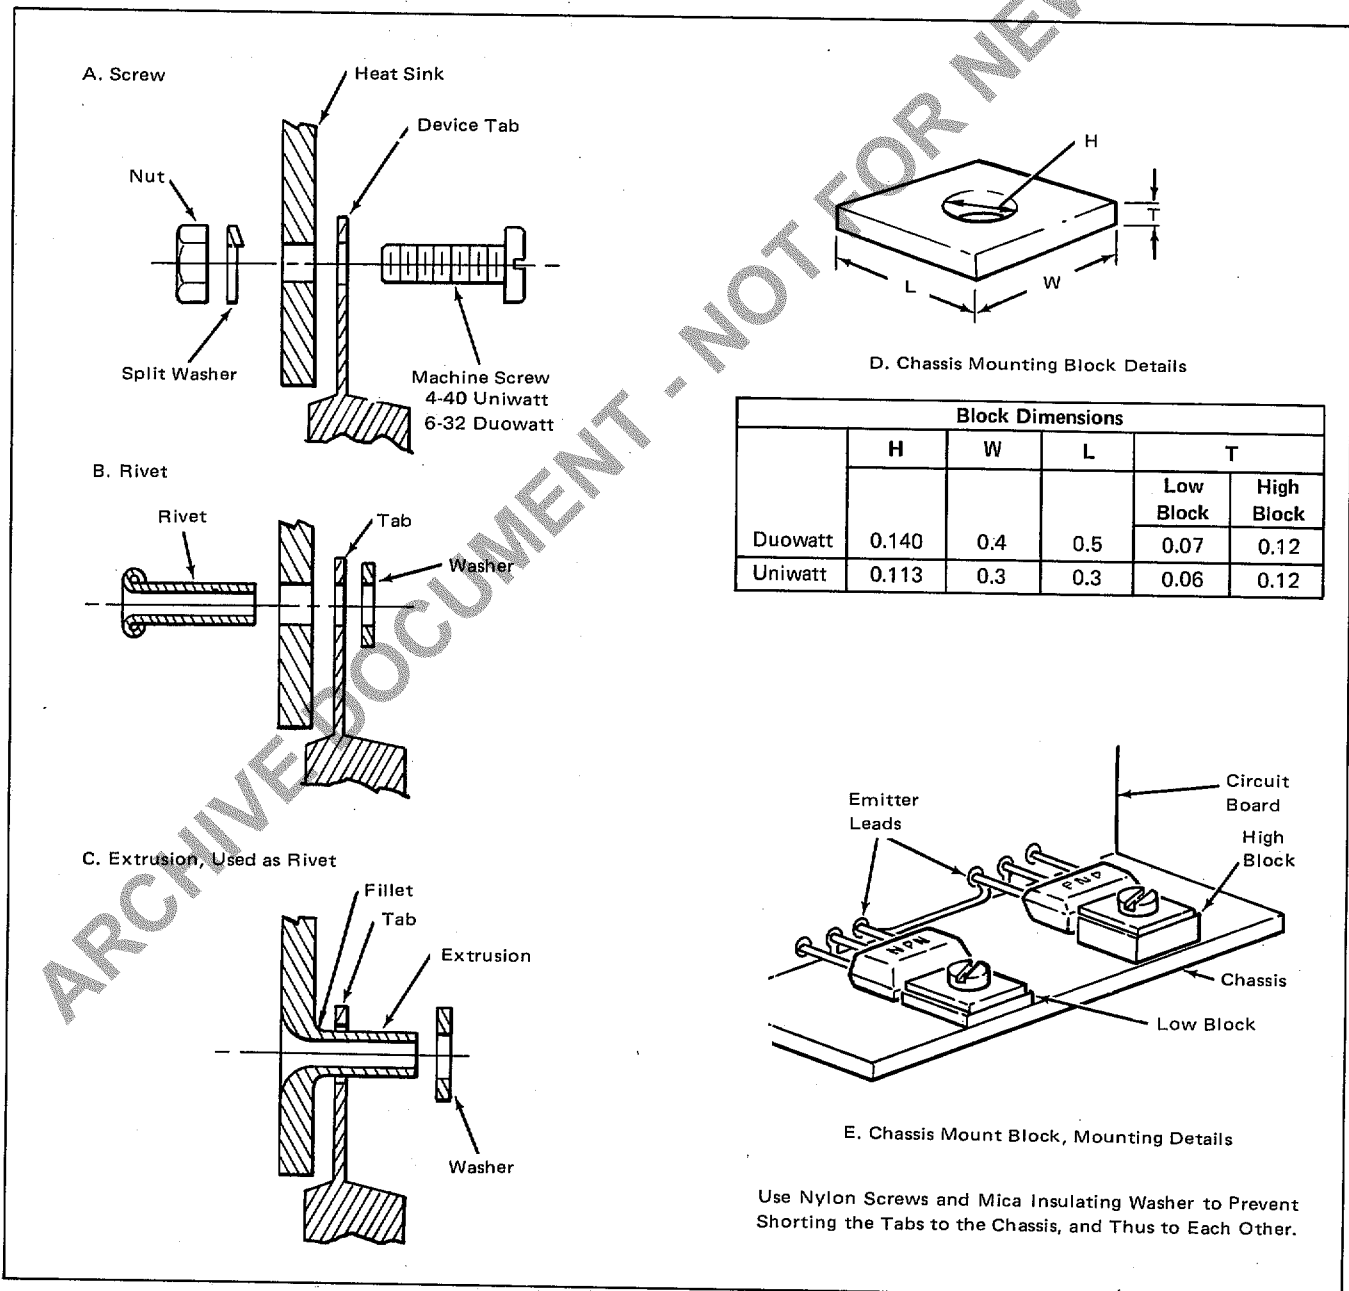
Methods of Mounting Duowatt and Uniwatt Transistors to a Heat Sink
